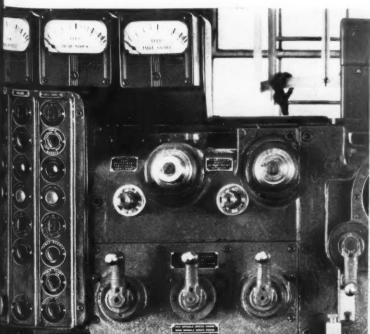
Horizontal boring, drilling and milling machine has tachometer instruments mounted on head to indicate feeds and speeds
